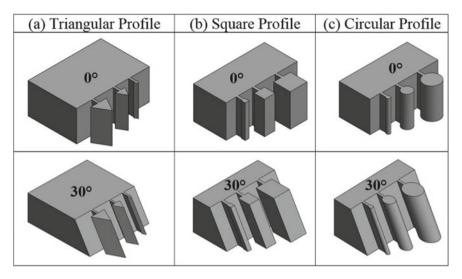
Machined a triangular, b square, and c circular taper profiles
